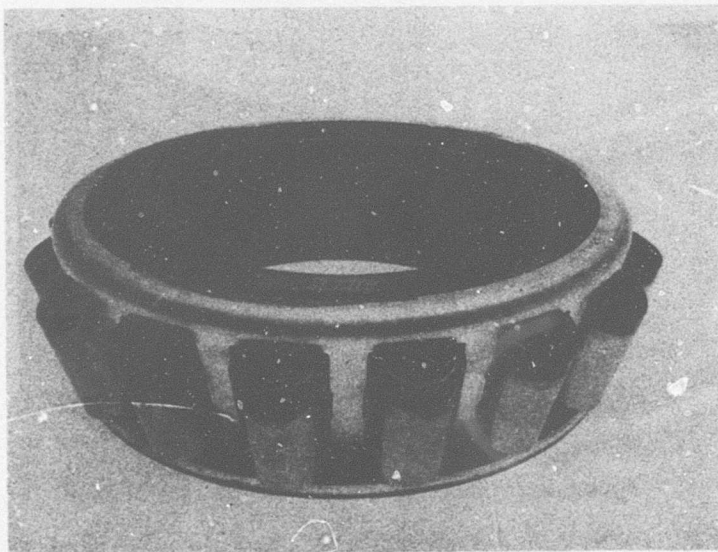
HM926700-Series Bearing After Test, Bearing No. 8, Test No. 12--Damaged After Running 9 Hours at 11,500 rpm. Damage Due to Bearing End-Play Adjustment Test.
